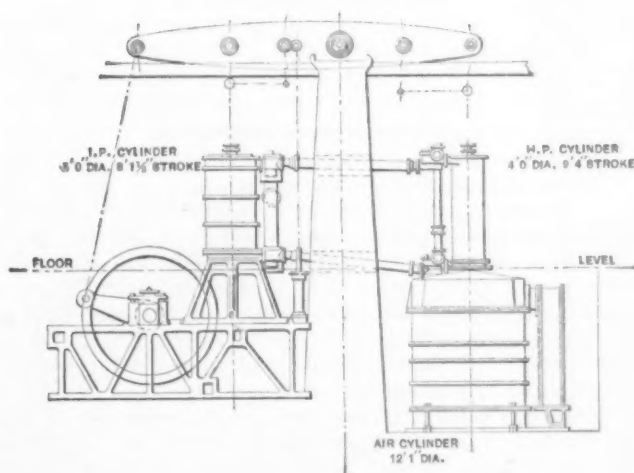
Old Dowlais Blowing Engine, About 1830.—Triple Expansion Arrangement.
